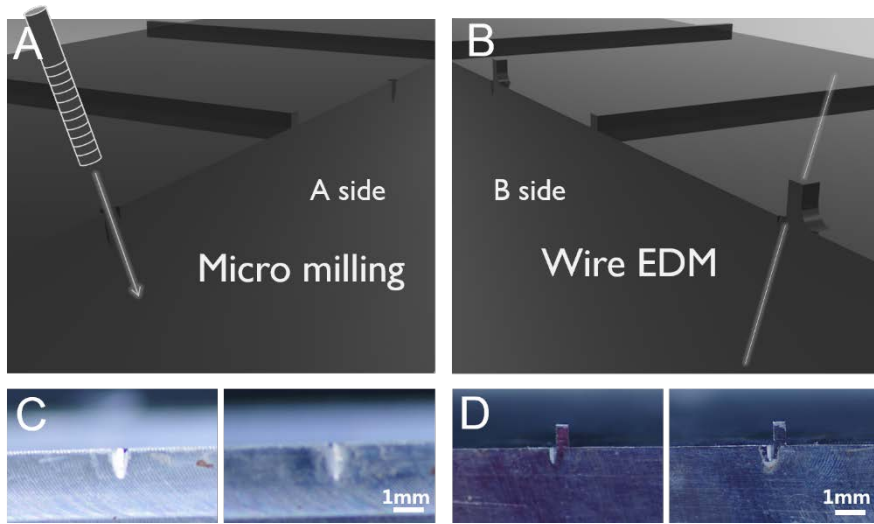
Machining process and mold image (A) a cavity is formed using an end mill as oblique line at the corner of block A, (B) in block B, there is a square boss to create a fluid outlet for fluid injection (C,D) actual magnified image of mold.
